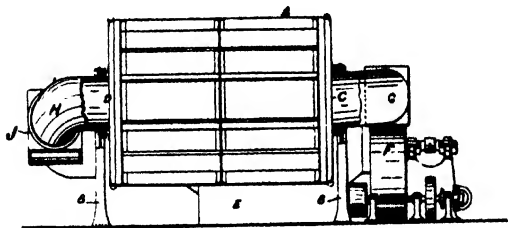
Moist Warm Air Withering Machine or Apparatus, with Rotary Leaf Container (sectional elevation).
